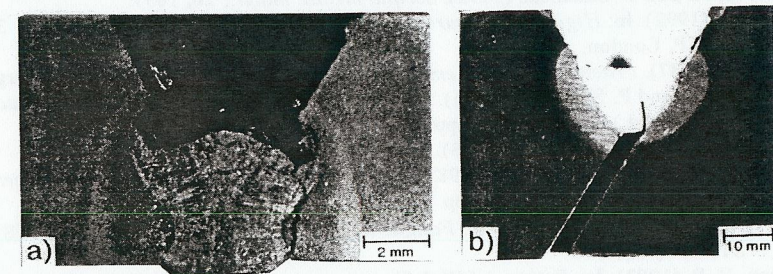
Macroviews of sectioned welds from a) RRC and b) Tekken test samples.
